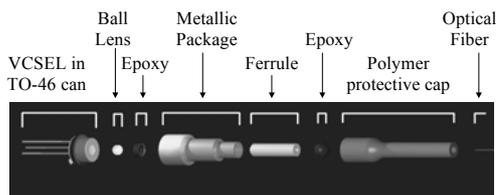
Exploded view of a pigtailed VCSEL under test, showing the different parts of the assembly.
